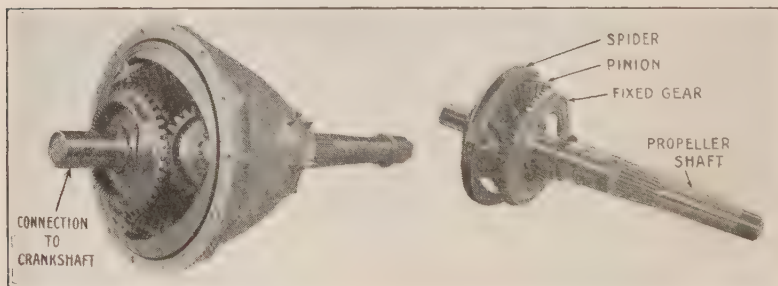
Farman bevel planetary reduction gear: (a) gear in place in gear housing; (b) gear removed from housing, showing planets, spider, and stationary gear. (Courtesy Automotive Industries, and Société des Avions H. & M. Farman.)
